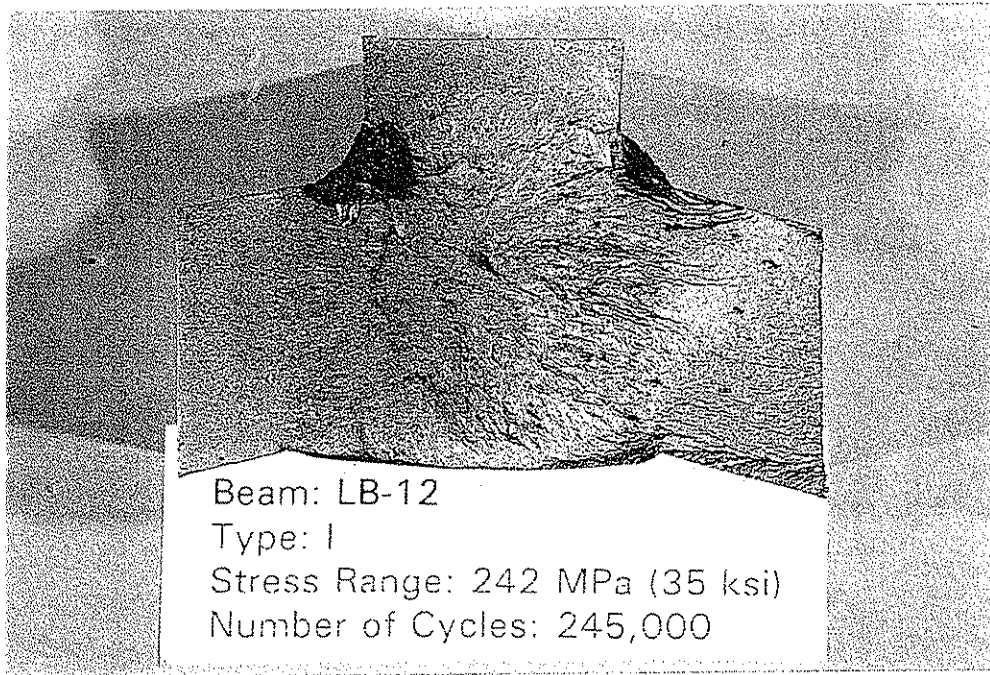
Hydrogen induced weld metal crack observed on EGW fatigue fracture surface.
